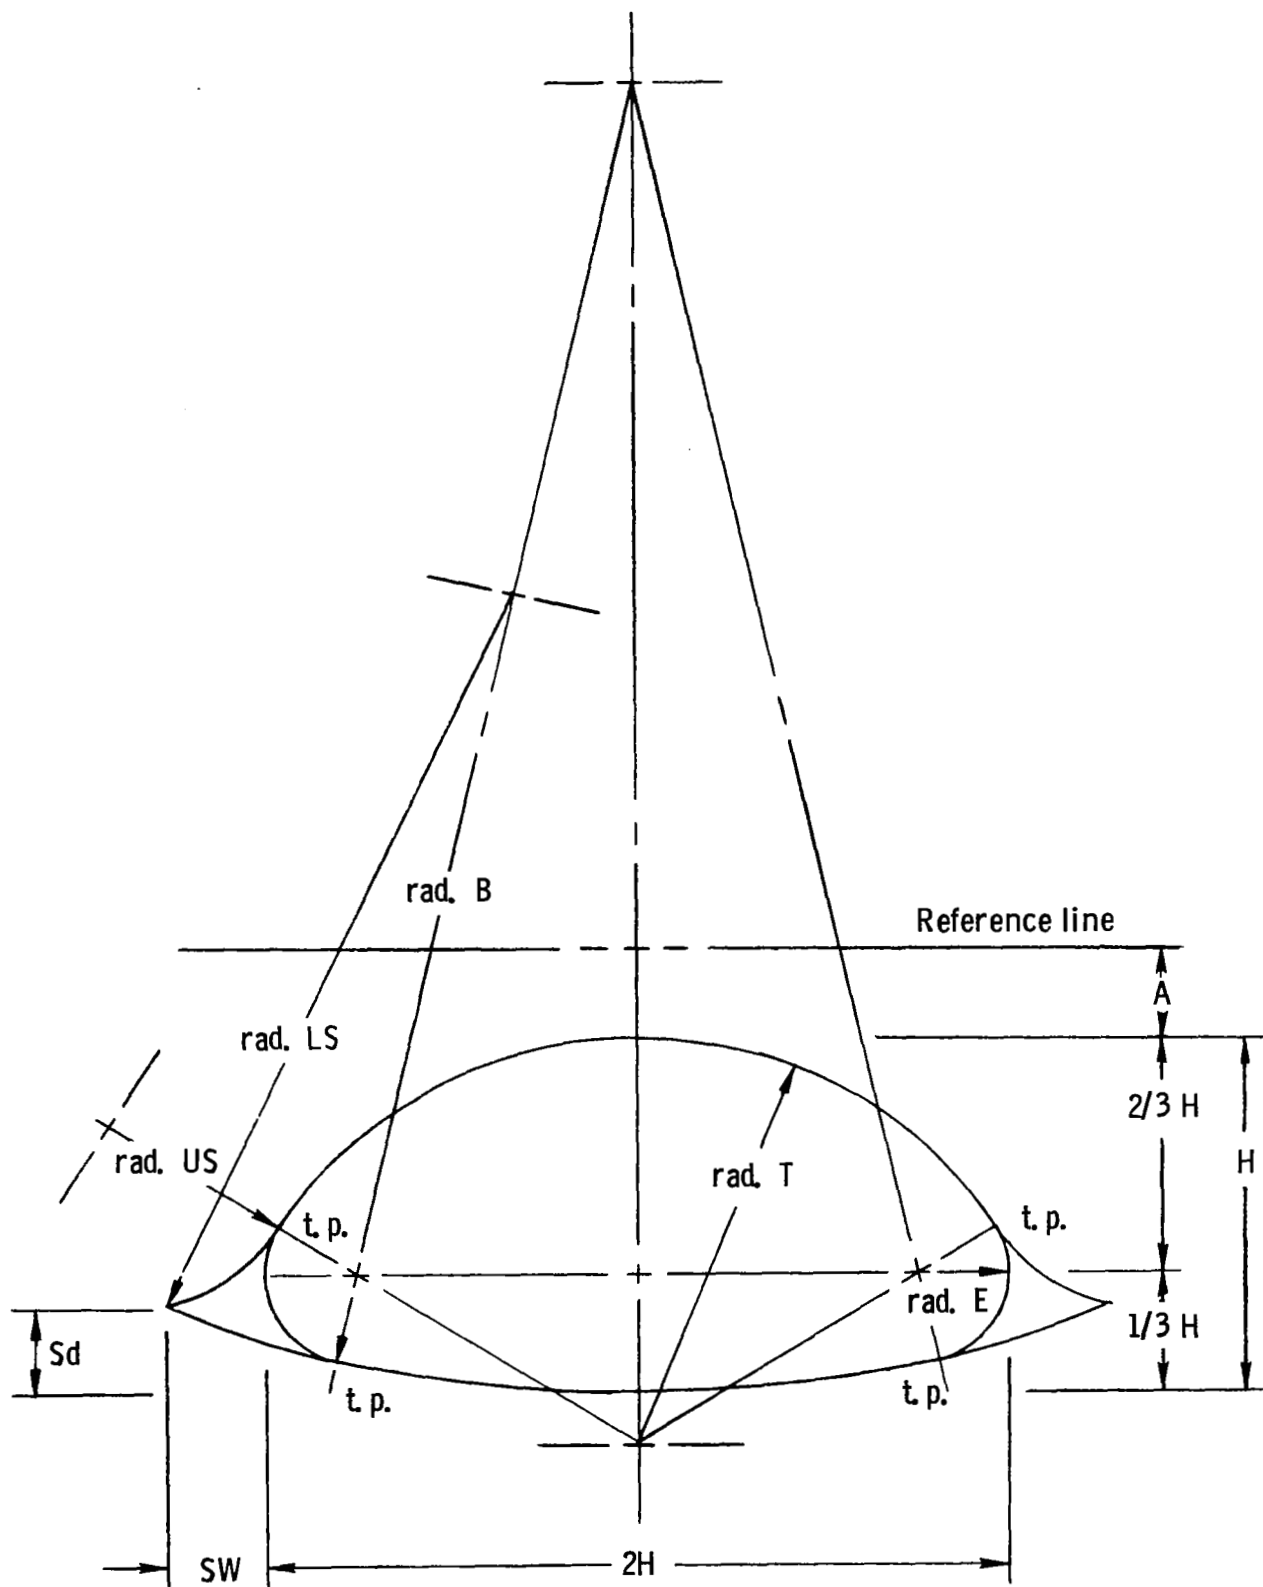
Detail of fuselage cross section and strake design. Dimensions are listed in table II.
